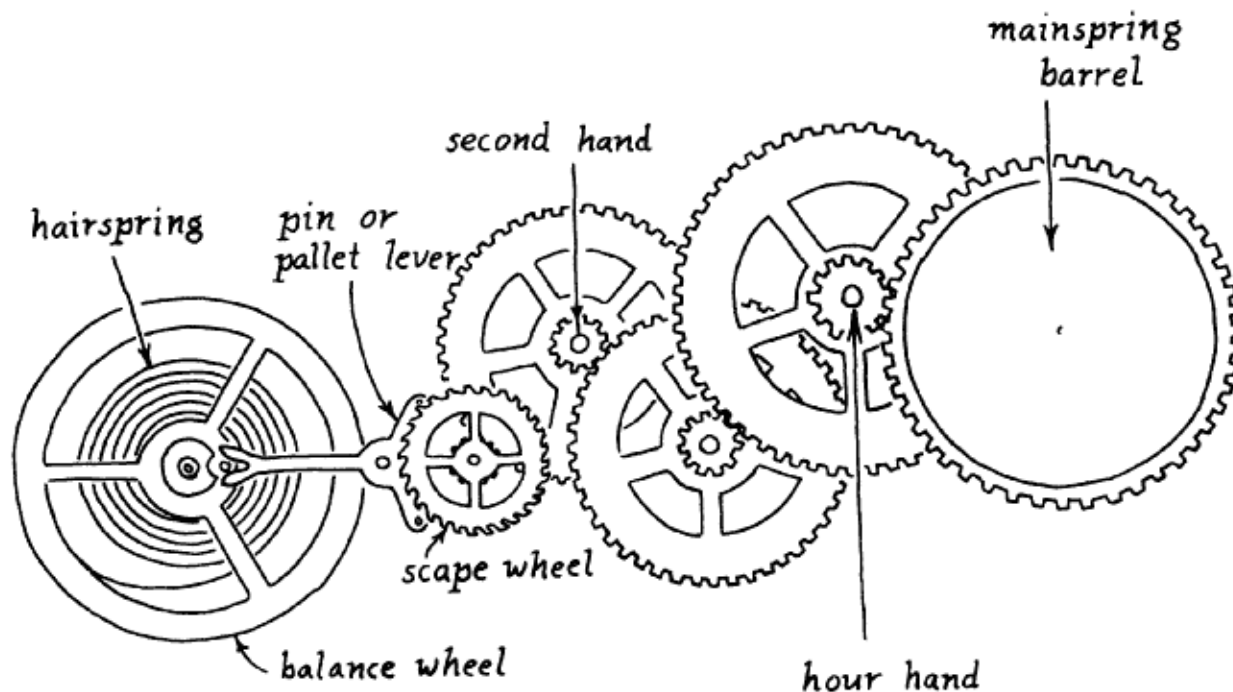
Pocket watch showing the relationship between power source (mainspring), gear train, escapement, mechanical oscillator (balance wheel and hairspring) and indicators (second and hour hands). The minute hand is driven by additional gears (not shown) from the hour-hand spindle.
